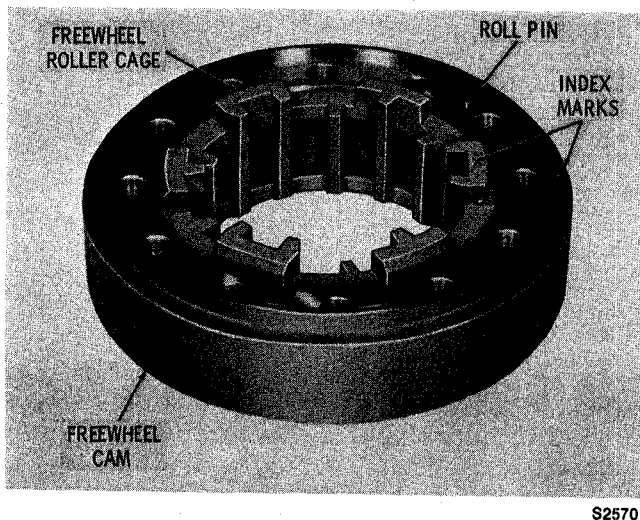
Freewheel roller cage installed in freewheel cam
